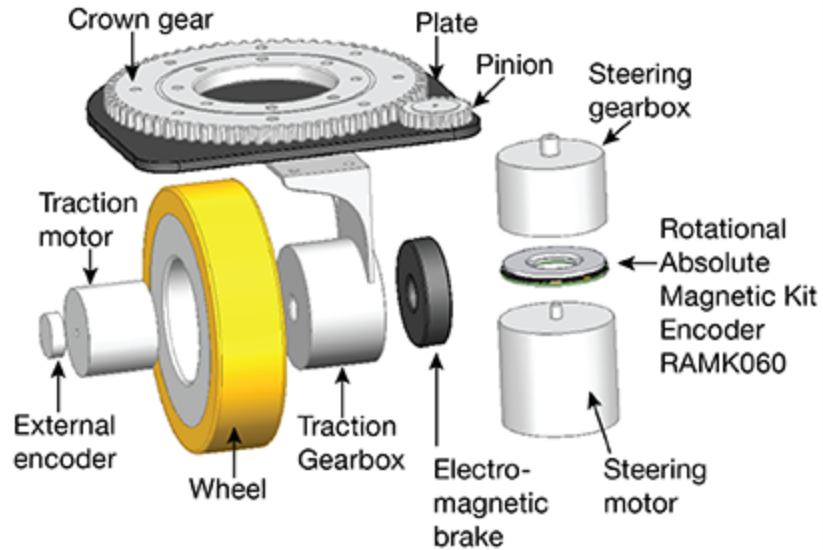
Assembly with RAMK060 Encoder for Wheel Steering Control
